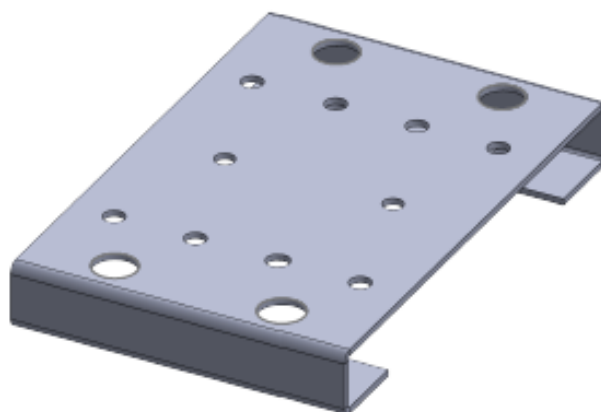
Layout Drawing of Incoming (SEC) Terminal Block Assembly for Single-Meterbox with Steel Enclosure
